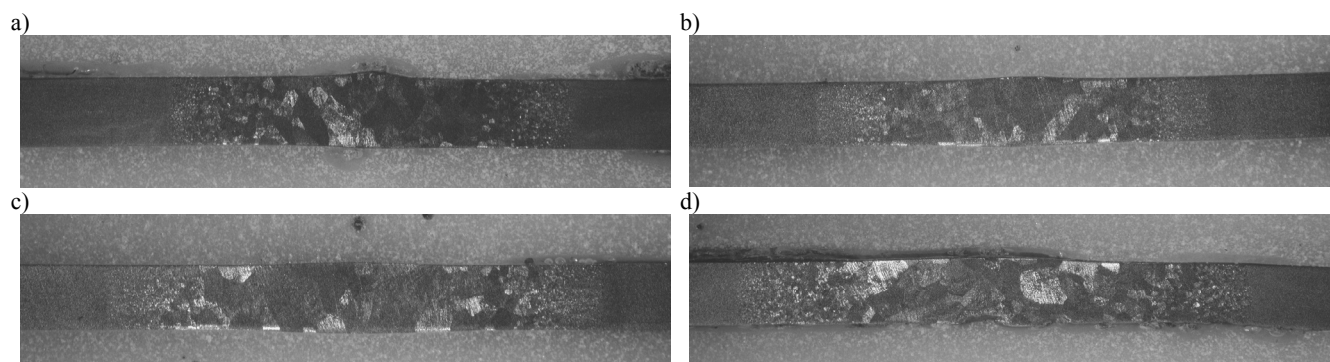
Macrograph of the cross section of bead-on-plate welds of titanium alloy Ti6Al4V sheets 1.5 mm thick laser welded with the HPDL (Table 5); a) weld no. 1, b) weld no. 2, c) weld no. 3, d) weld no. 4
